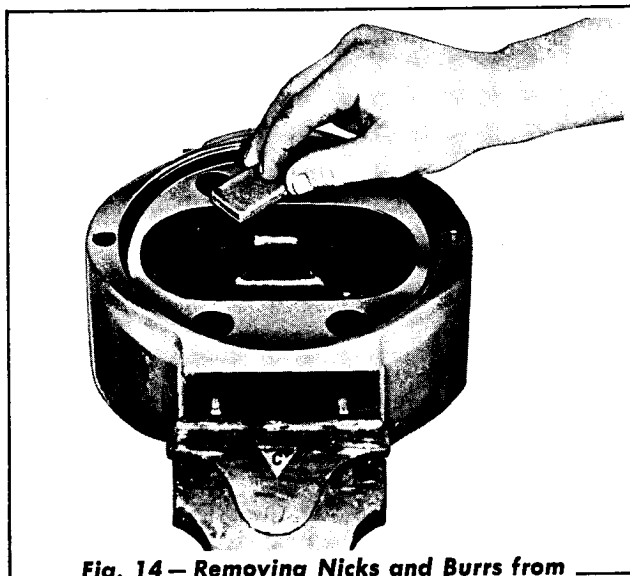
Removing Nicks and Burrs from Gear Housing
